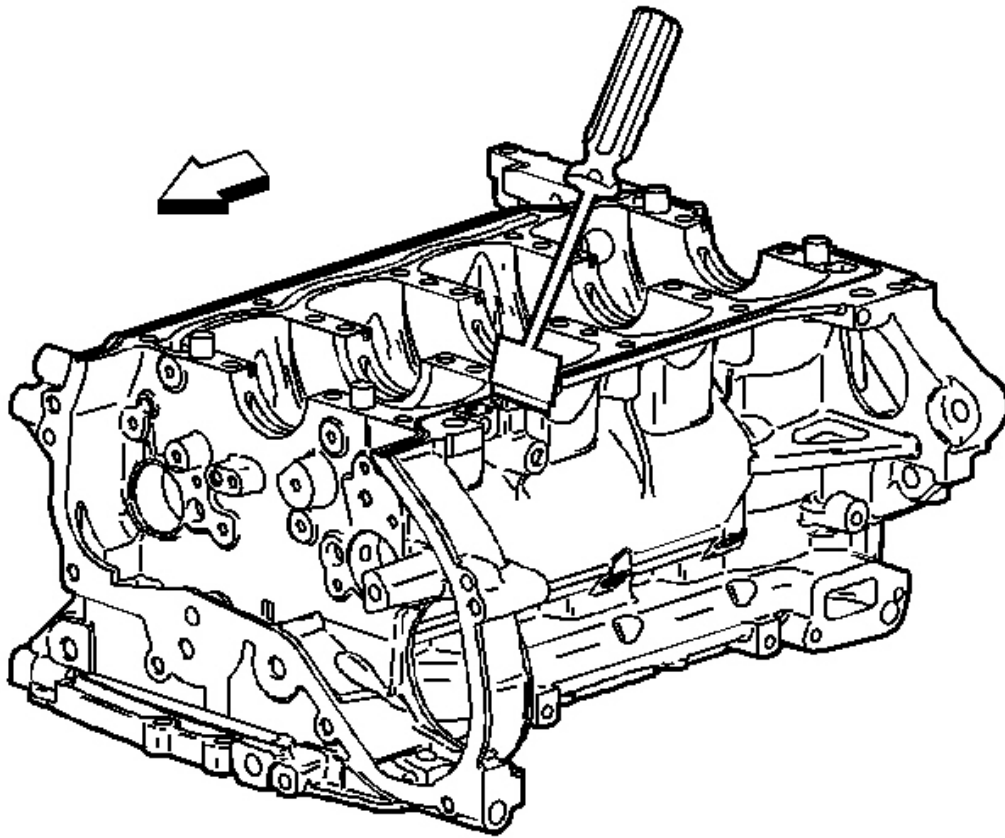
Cleaning Sealing Material From The Gasket Mating Surfaces Of Engine Block
